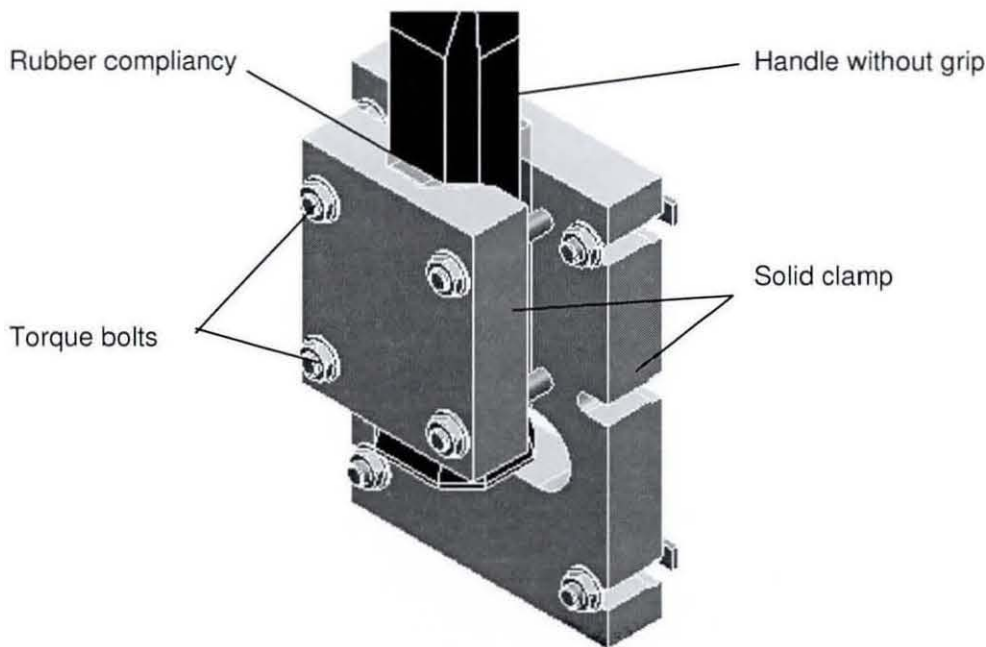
The test set-up and handle clamp used in the rigid clamped COR tests.
